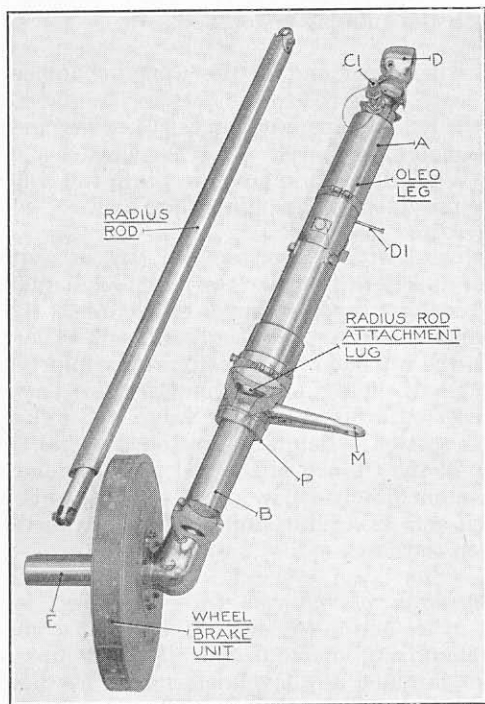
Oleo leg (port) with axle and wheel brake unit
